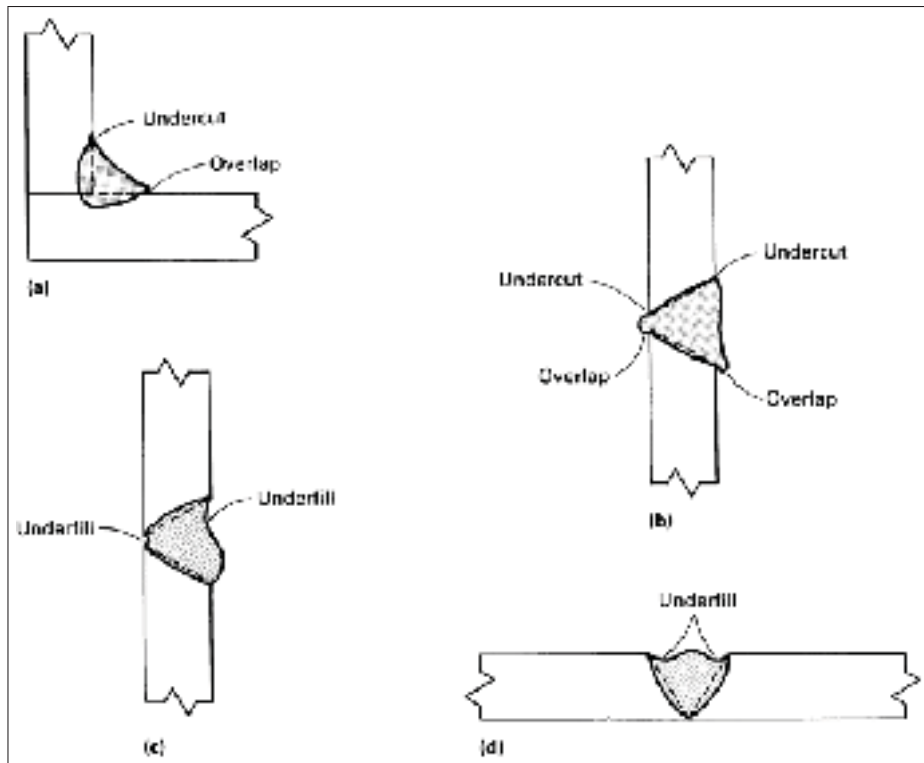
In a fillet weld, undercut and overlap are represented in (a). In (b), undercut and overlap are depicted in a groove weld. In (c) and (d), there is an illustration of underfill in groove welds.
